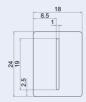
Schematic drawing of adhesive tape gasket for Fluidic 1004 - straight channel shape
